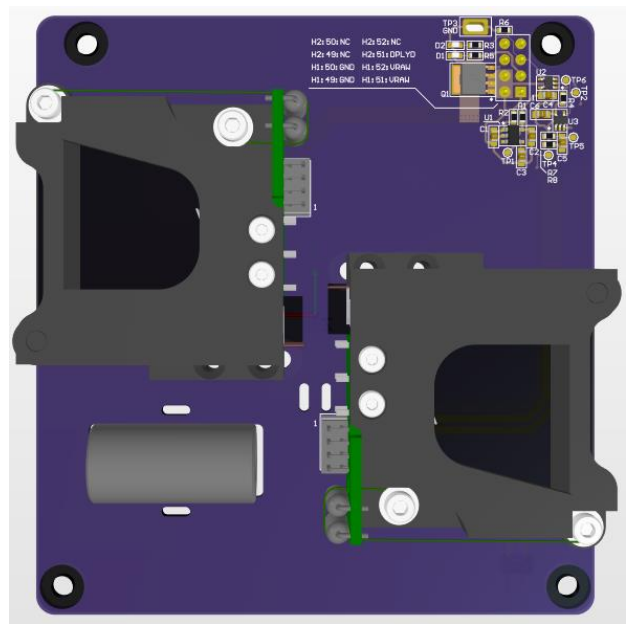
Altium capture of the antenna PCB with components, bottom side.
